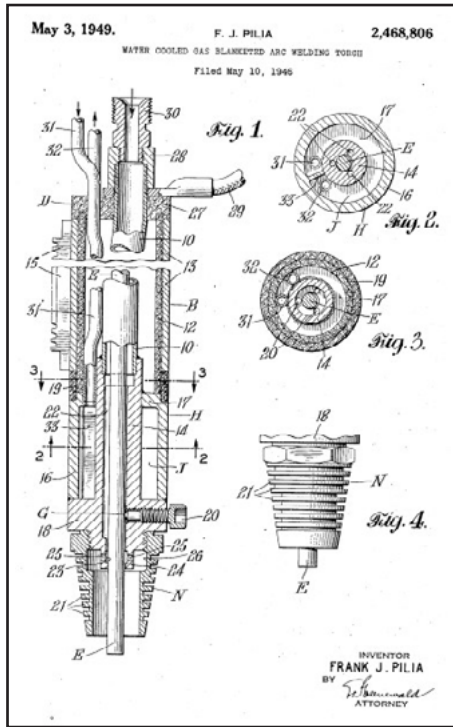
Patent by F. Pilia; no. 2468806 “Water-cooled gas blanketed arc welding torch” 03.05.1949 [24]
